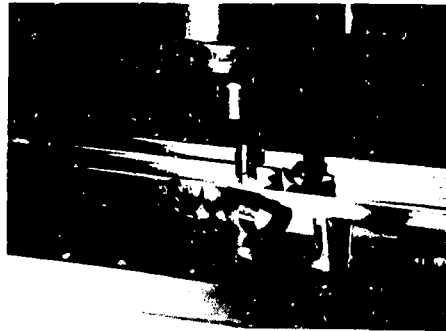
Finishing an End-Milled, Long-Radius, Cylindrically-Curved Surface by Planing in a Continuous-Path, Three-Axis, CNC Milling Machine
